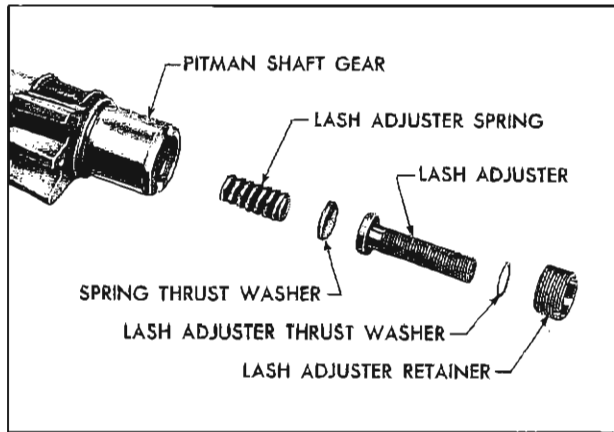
A-13 Parts in End of Pitman Shaft Gear
